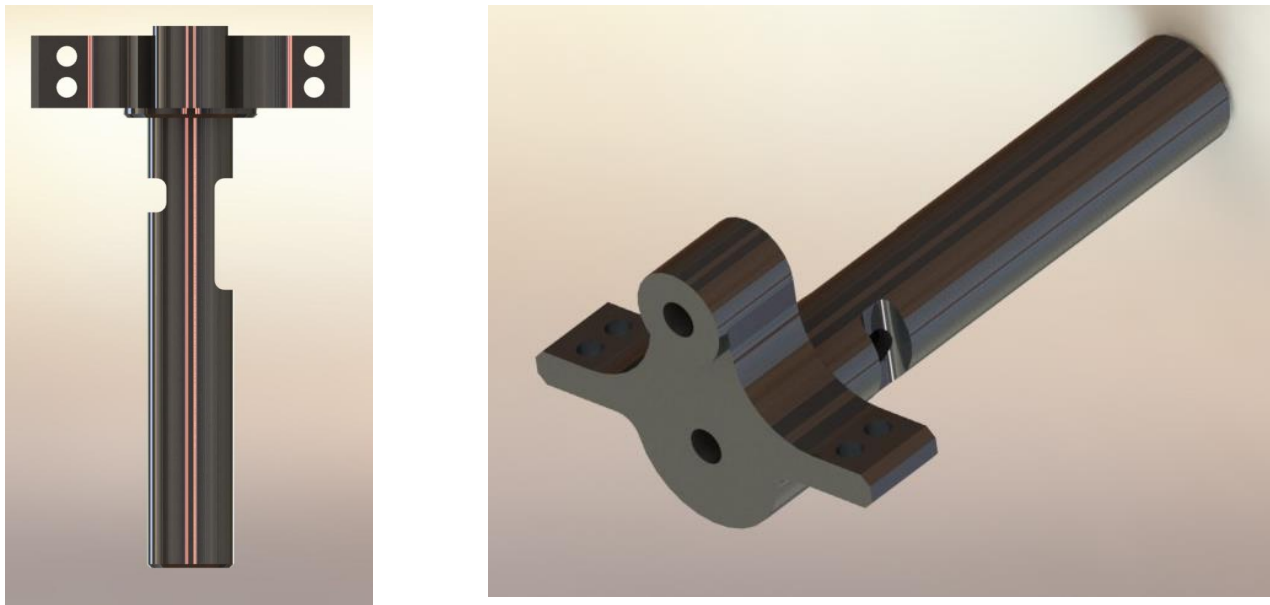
(Left) Solid Model of Crankshaft Top View; (Right) Solid Model of Crankshaft Isometric View
